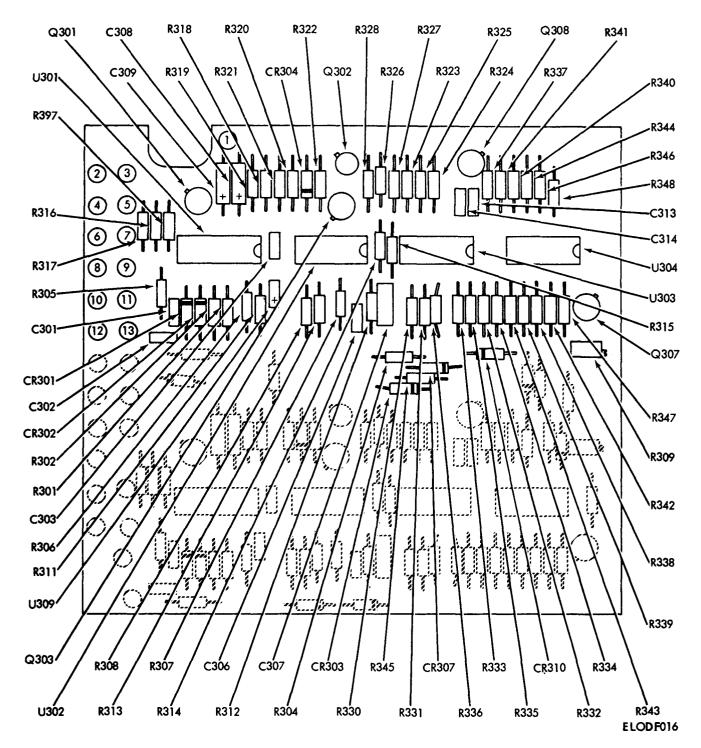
①. BØ CØ modulator printed circuit board assembly (A3) (sheet 1 of 2).
